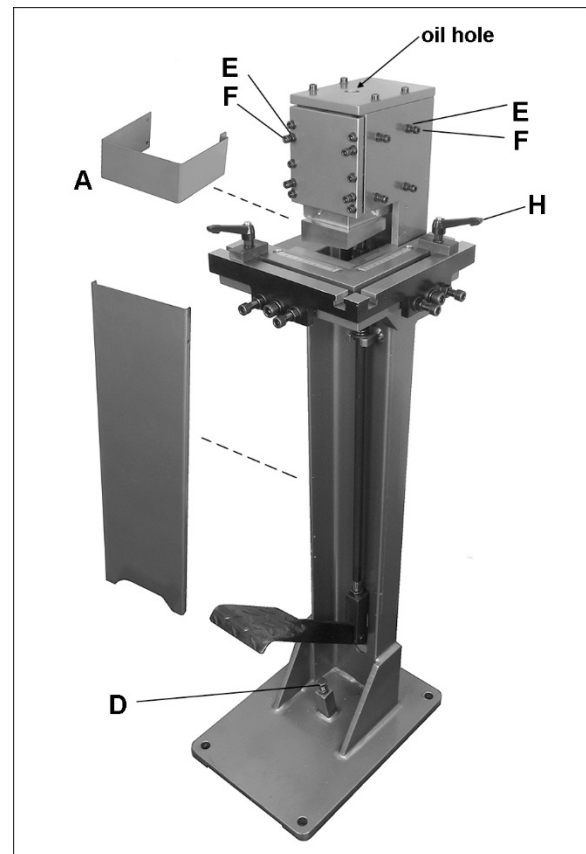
(shown with guards removed; all guards must be installed before operating)
